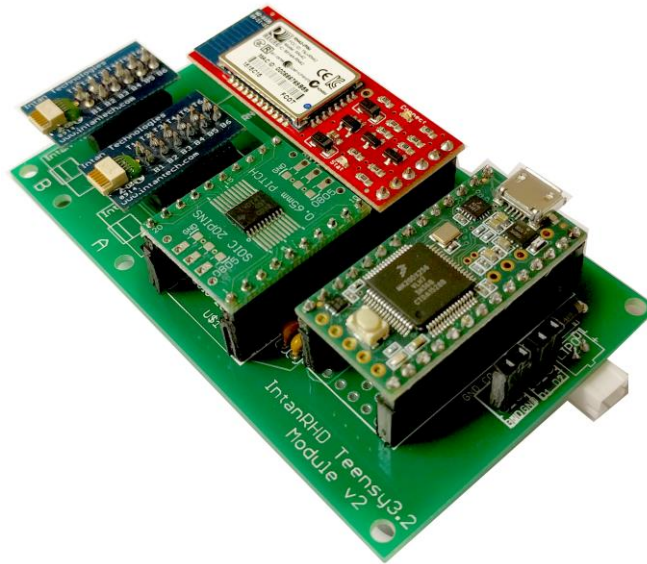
Assembled Intsy PCB. Battery connection and Intan RHD2132 amplifiers not shown.
